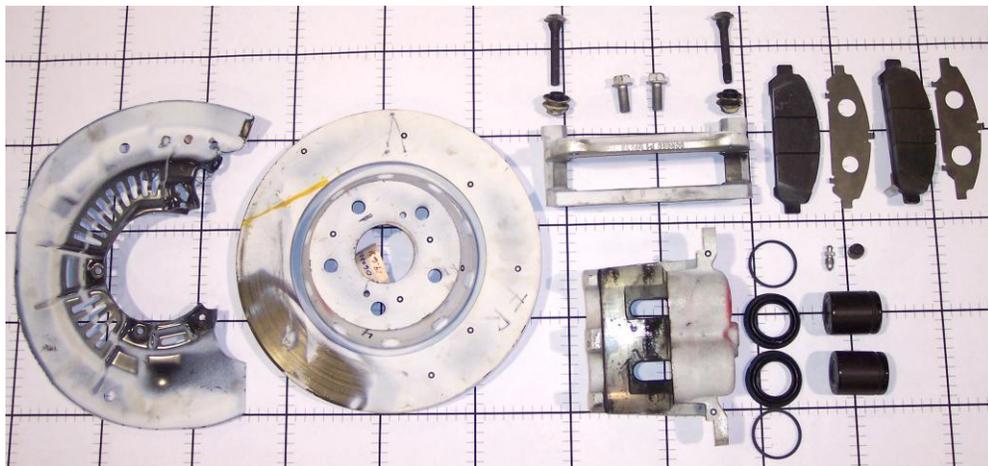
Front Rotor / Drum and Shield Subsystem Current Major Components
